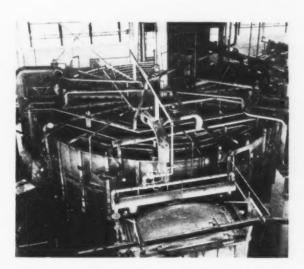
A Hagan rotary furnace, equipped with mechanical loading and unloading devices, heats 300 billets per hr.
